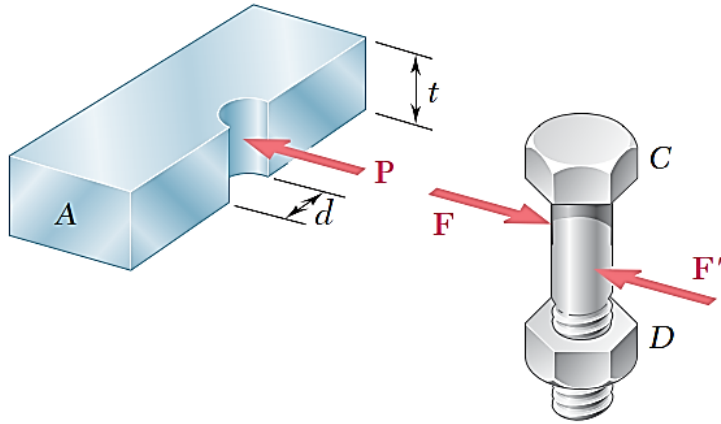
Equal and opposite forces between plate and bolt, exerted over bearing surfaces.
